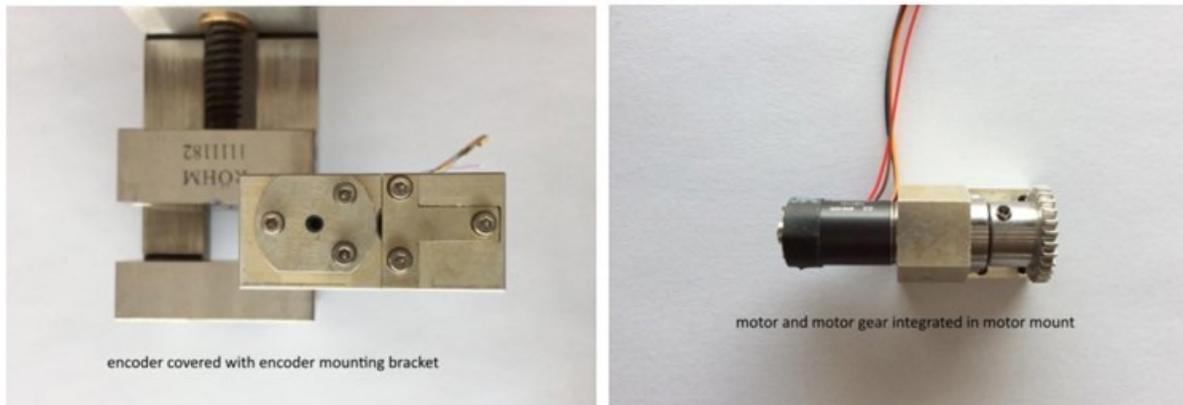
(Left) Bearing and encoder cover on side view of the mechanism. Note that countersunk screws have replaced the screws on the bearing/encoder covers. (Right) Motor mount with integrated gear-motor and motor gear.
